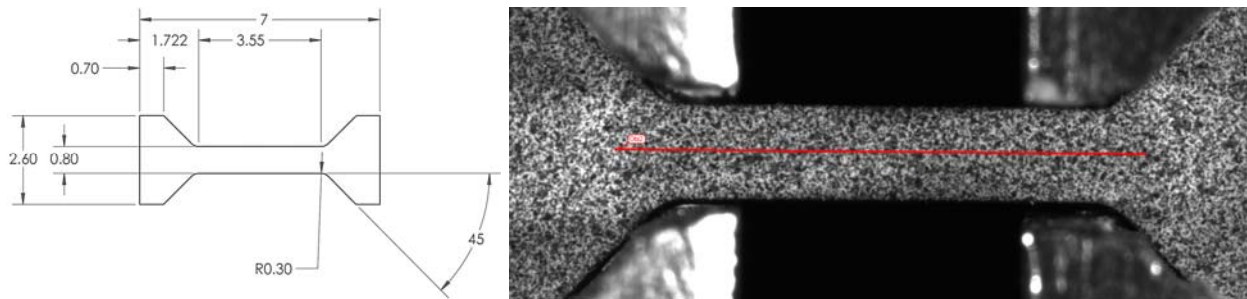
Drawings (left, dimensions are in millimeters [1]) and typical digital image of the SS-Mini tensile specimen (right) showing the surface coating and the superimposed line on the gauge section that is used in the DIC analysis.
